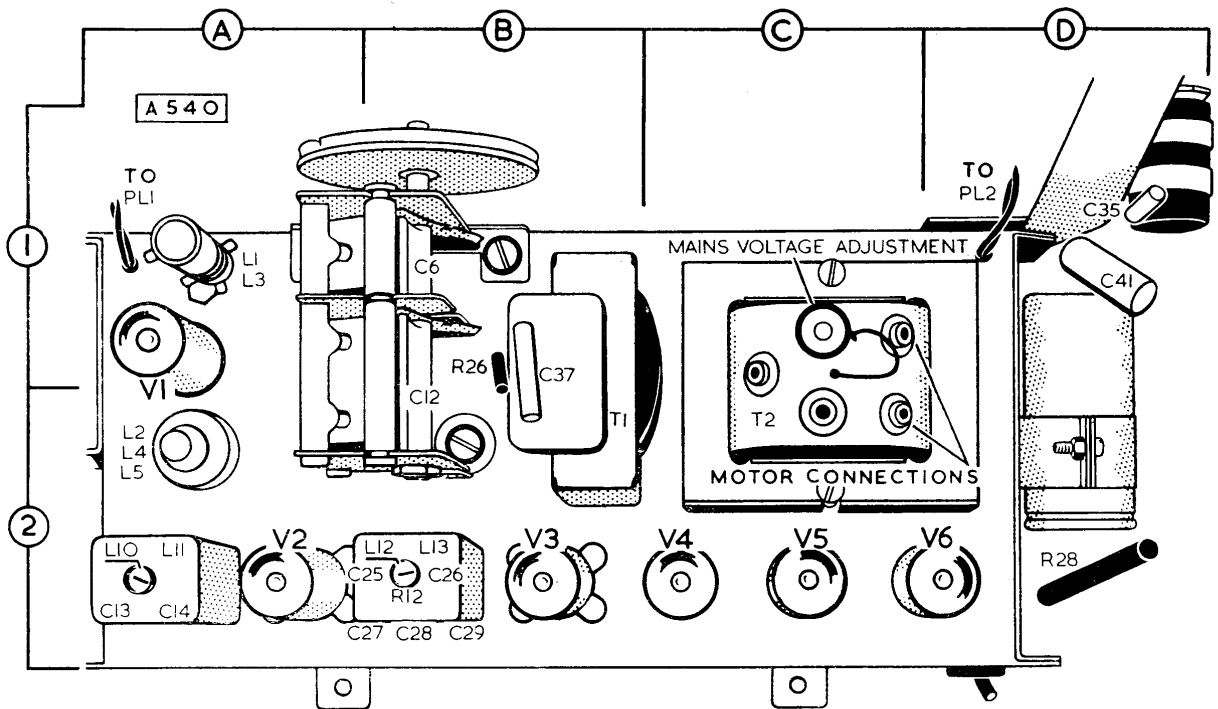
Plan view of receiver chassis, showing locations of valves and components.
